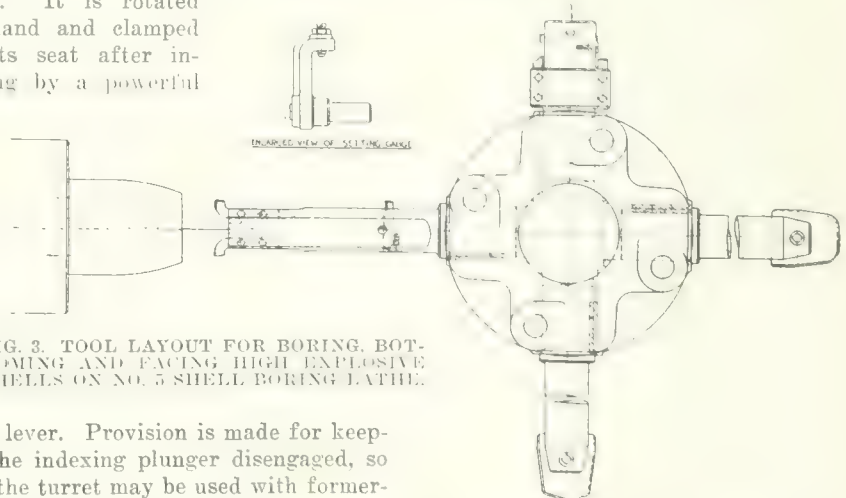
TOOL LAYOUT FOR BORING, BOTTOMING AND FACING HIGH EXPLOSIVE SHELLS ON NO. 5 SHELL BORING LATHE.
